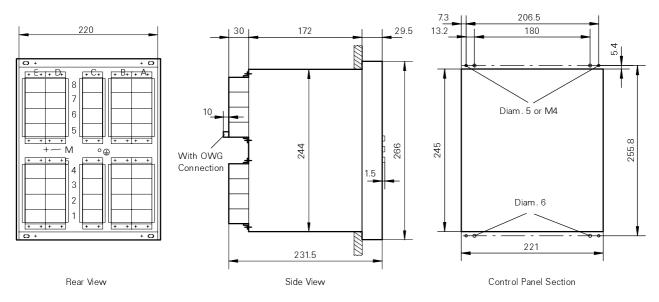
Dimensional Drawing of 7XP2040-2 for Panel Flush Mounting or for Cubicle Installation, Device Version 7SA519 (all dimensions in mm)
